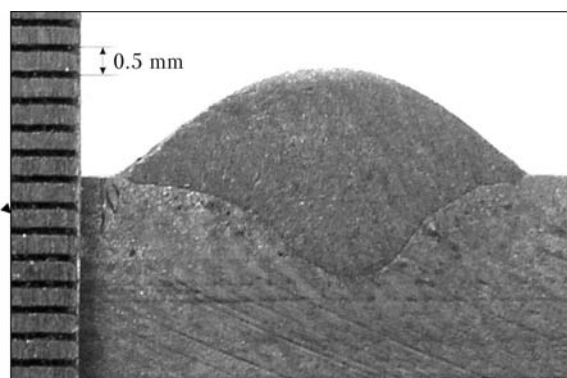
Weld macrosection ($U_a = 19$ V; $I_w = 160$ A; $v_w = 0.75$ cm/s)
